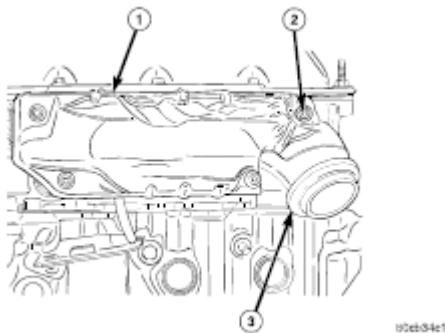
Identifying Exhaust Heat Shield (Left Side)
